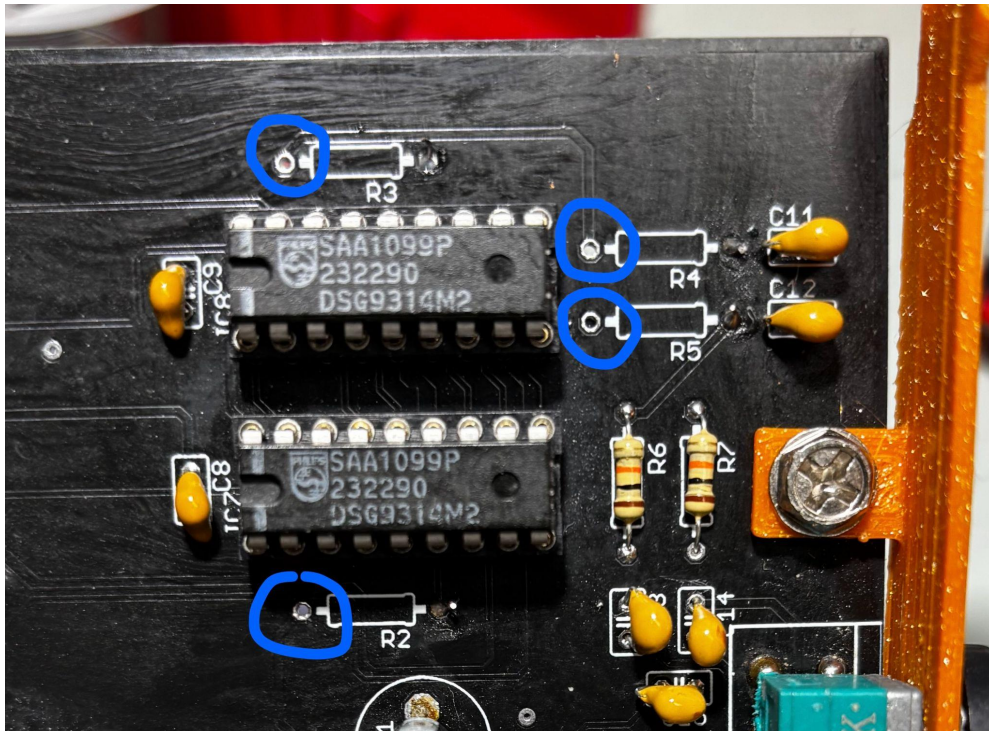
R2 to R5 are no longer at the front of the PCB (moved to the back) and their left pins go unsoldered
